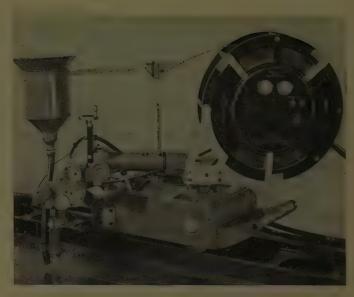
Medium-duty portable welding machine with seriestype control handles welding currents up to 1,200 amperes
